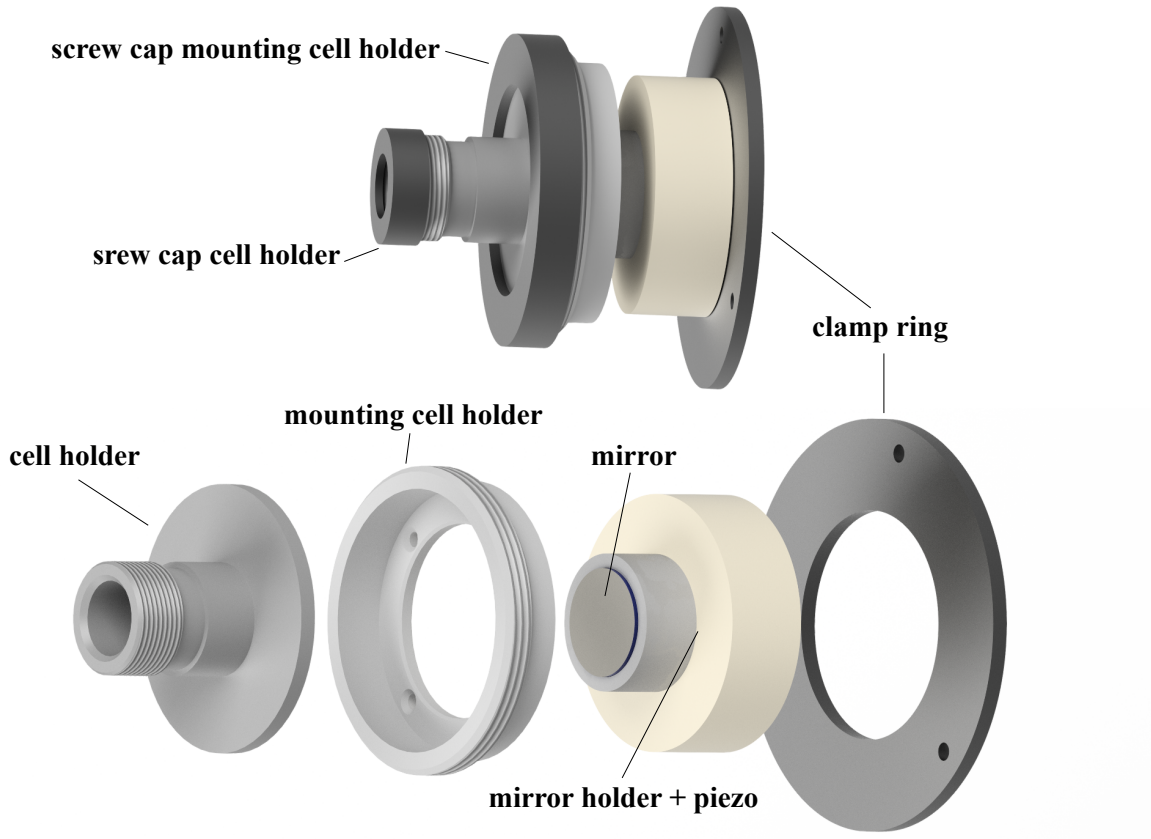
Rendered technical CAD drawings of the cell and mirror holder, without showing the aluminum retaining plate. Above, these are shown assembled with the locking caps. Whereas below the individual parts are shown for illustration. The individual parts are labeled in each case.
